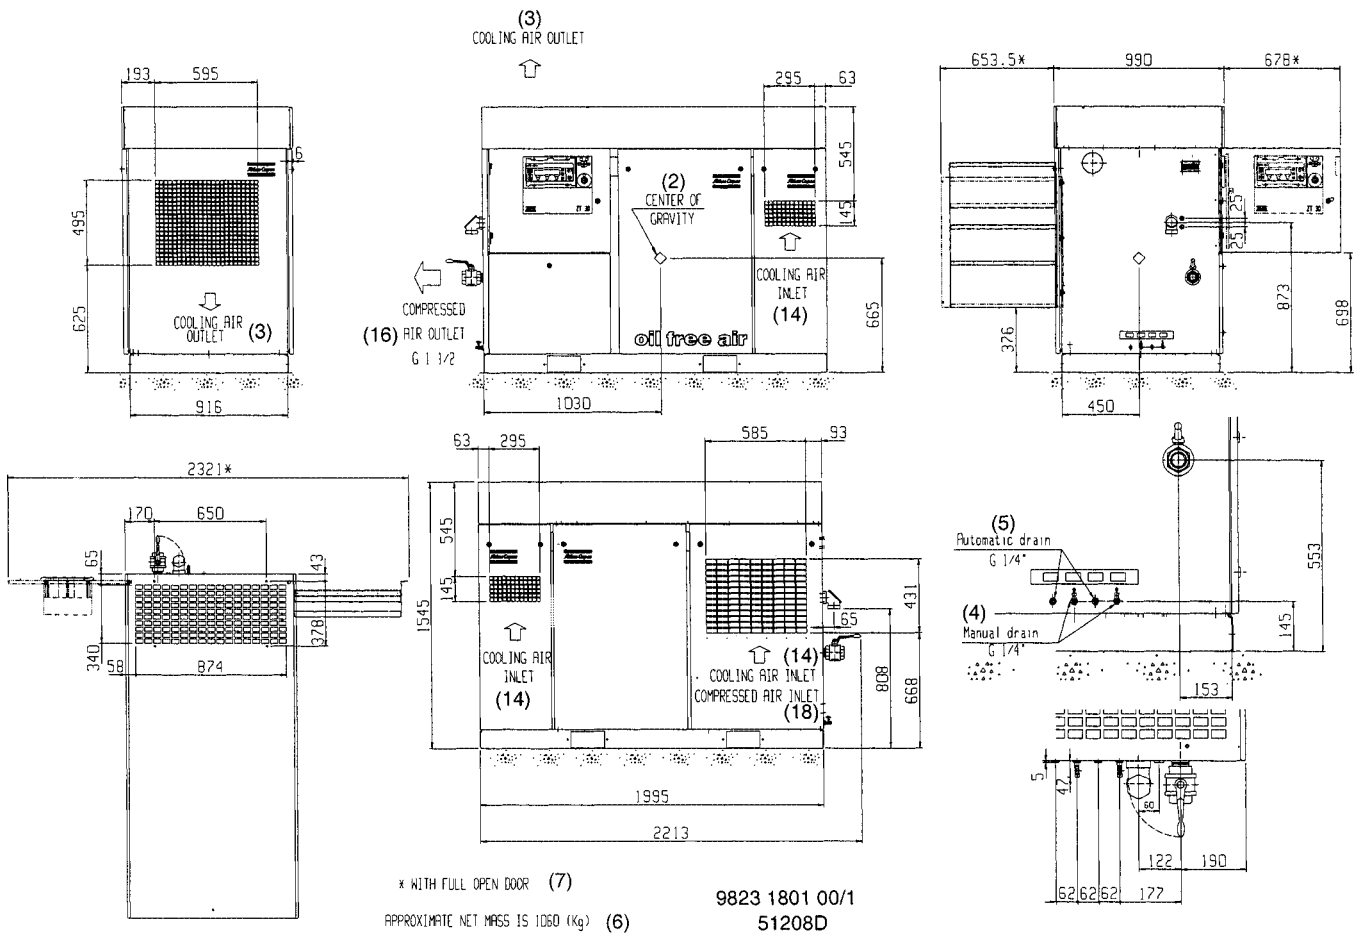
Dimension drawing, ZT18/30 HAT
